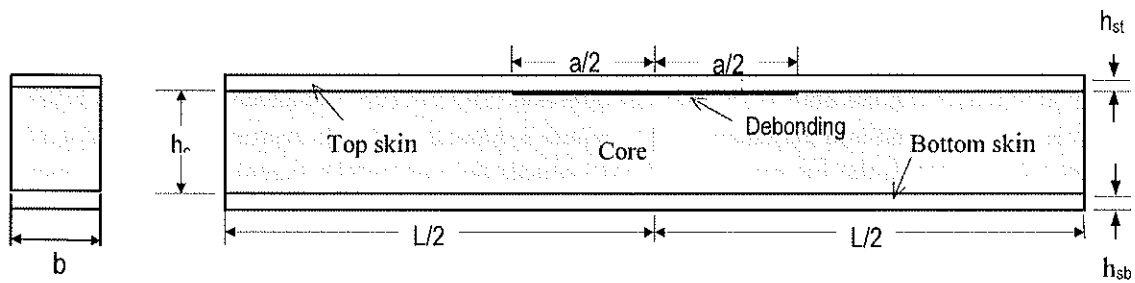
Longitudinal and cross sections of the sandwich beam with a central debonding
